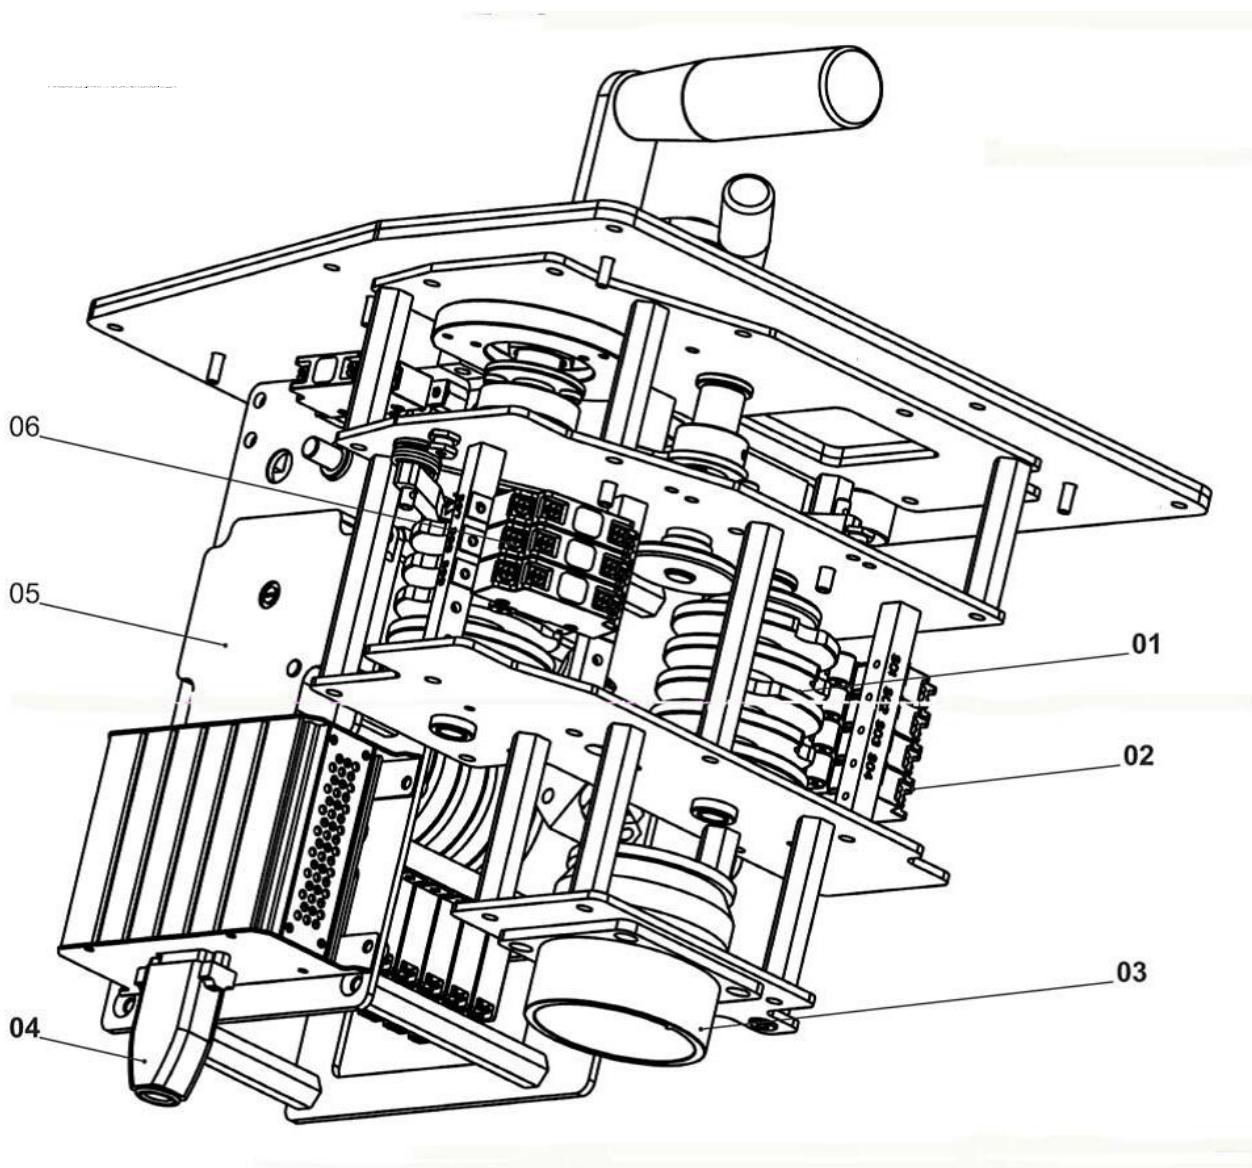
I-02.36 Master Controller Gears - Internal View (1/2)
